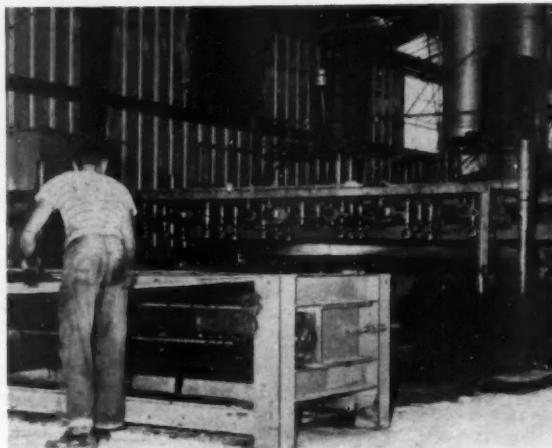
Experimental installation at the Butler Manufacturing Co. for handling the automatic spray painting of roofing and siding for steel buildings.
